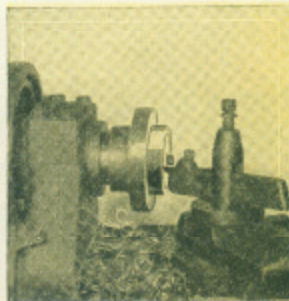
Manufacturing Steel Gear Blanks in the Lathe.
